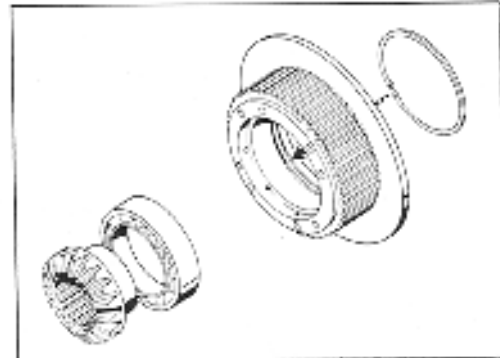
Reverse Clutch Flange, Roller Bearing and Bevel Gear
